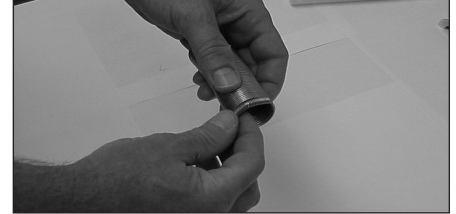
Insert the Inner Spring over one end of the Corona Ring.
